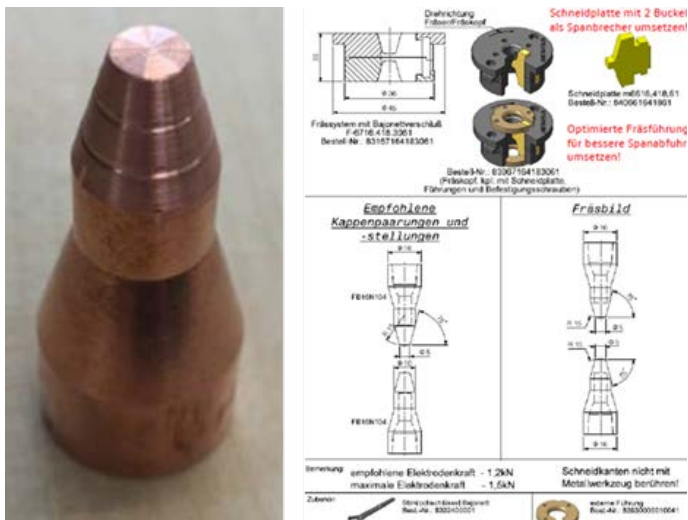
Welding cap (electrode) for two-sided spot welding and milling head documentation
